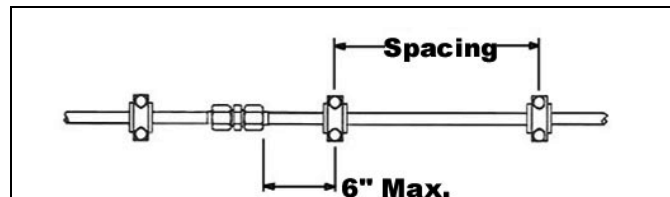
Use proper clamping to reduce strain due to vibration. See Table A for recommended clamp spacing. Final tightening of hose/tube connections should be completed before tightening of supports and clamps.
